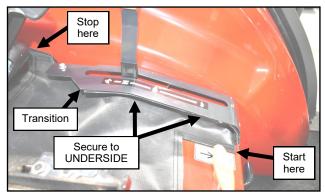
(Secure Front Left Corner Of Under Seat Filler)
